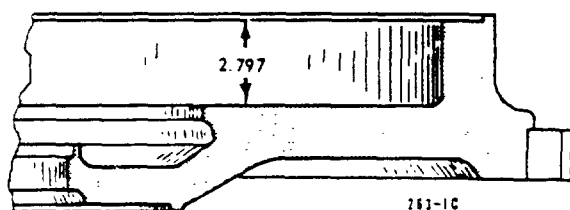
Flywheel Rubbing Surface-to-Clutch Cover Bolting Surface Dimension
